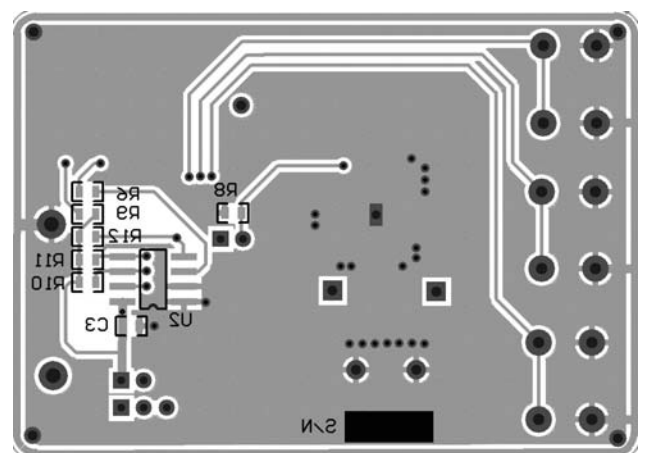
AAT2869 Evaluation Board Bottom Side Layout.
